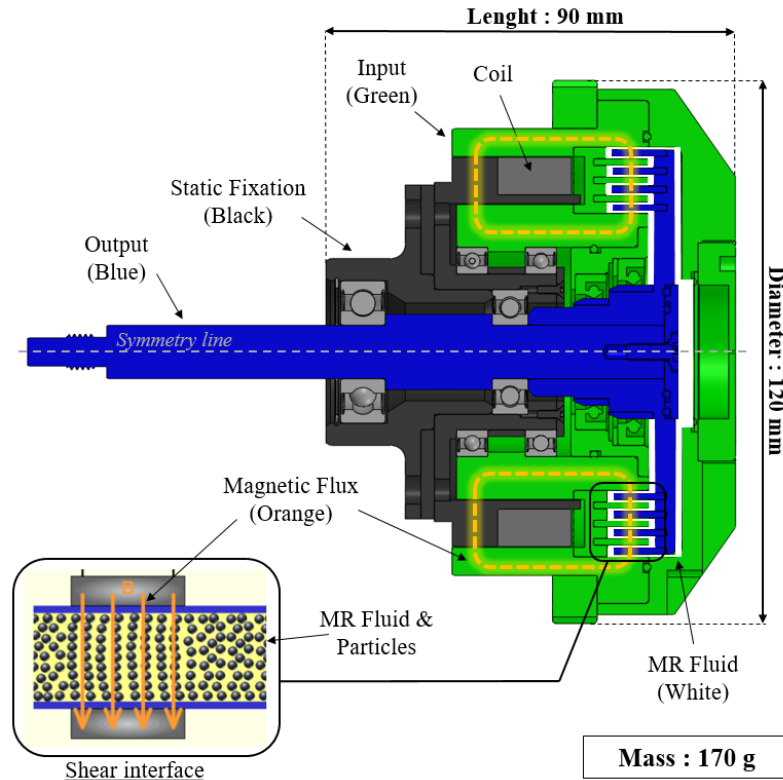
Cut view of Exonetik's 37 N.m MR Clutch.
